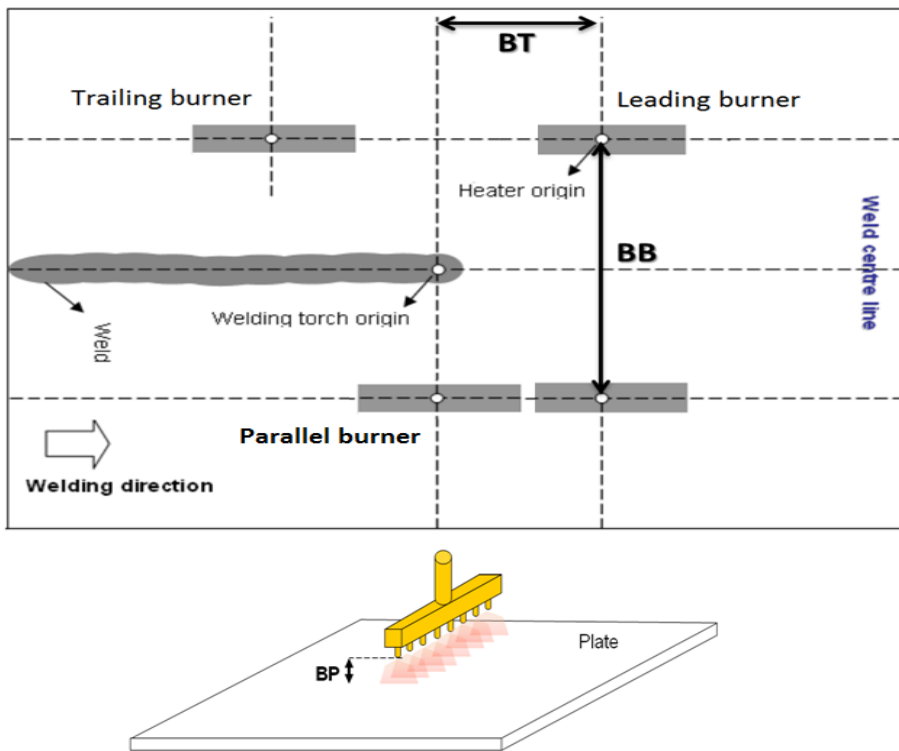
A schematic drawing of the positional process parameters involved in welding with additional heat sources: Burner separation (BB), Burner distance to the welding torch (BT) and Burner distance to the plate (BP).
